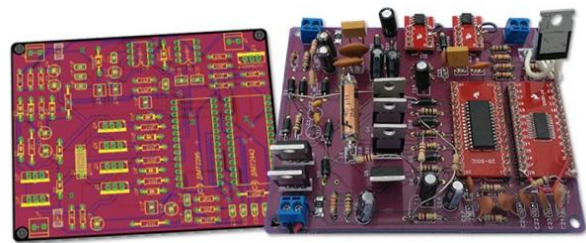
System Battery Charger PCB and Assembled Circuit Board
